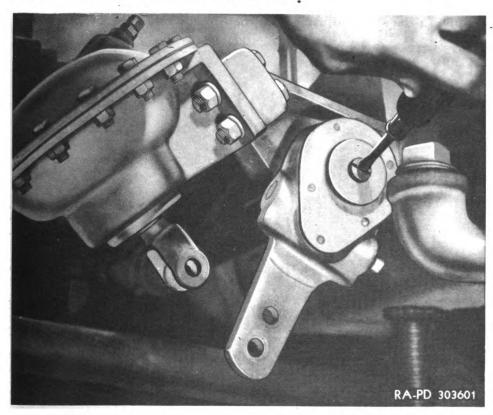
Removing Rear Slack Adjuster Retainer Washer
